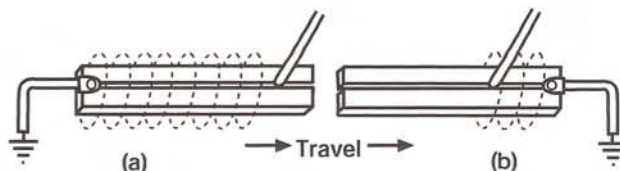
Flux due to the welding current returning to the workpiece connection is behind the arc in (a) and ahead of the arc in (b).
